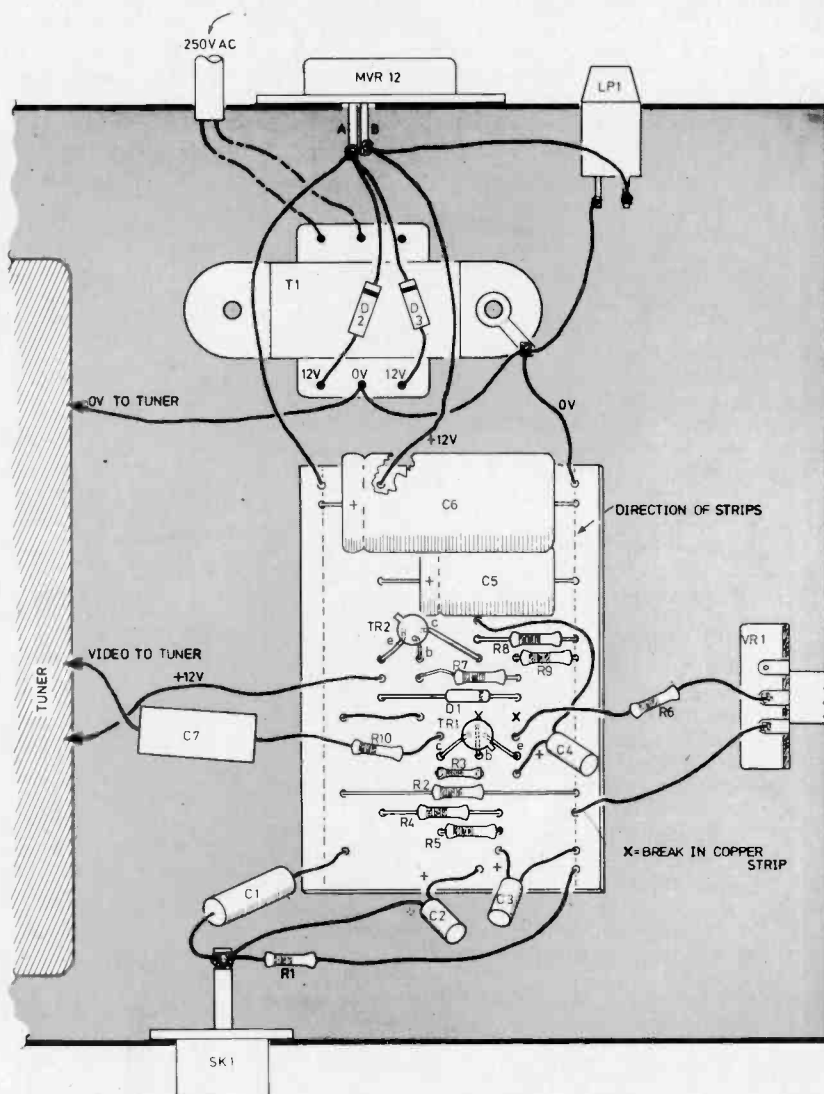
Component layout of sync separator, video inverter and power supply. Tuner unit is adjacent
